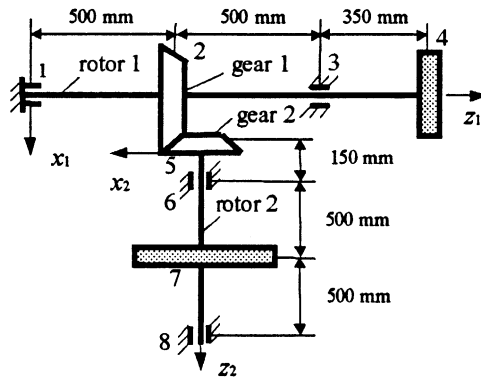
A rotor-bearing system geared by spiral bevel gears.
